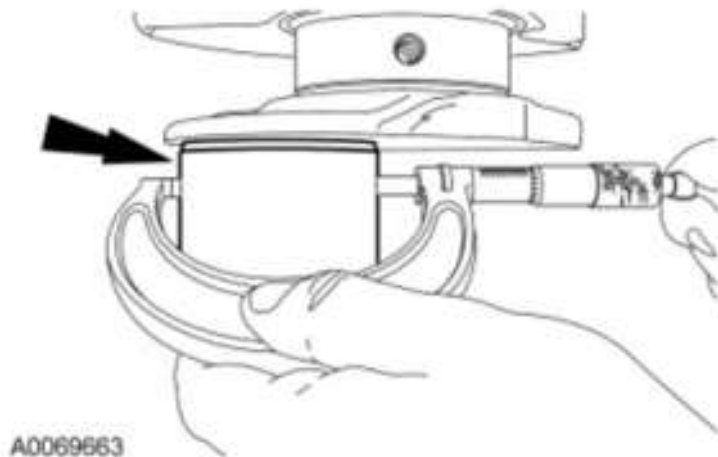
Measuring Crankshaft Connecting Rod Bearing Journal Diameter
